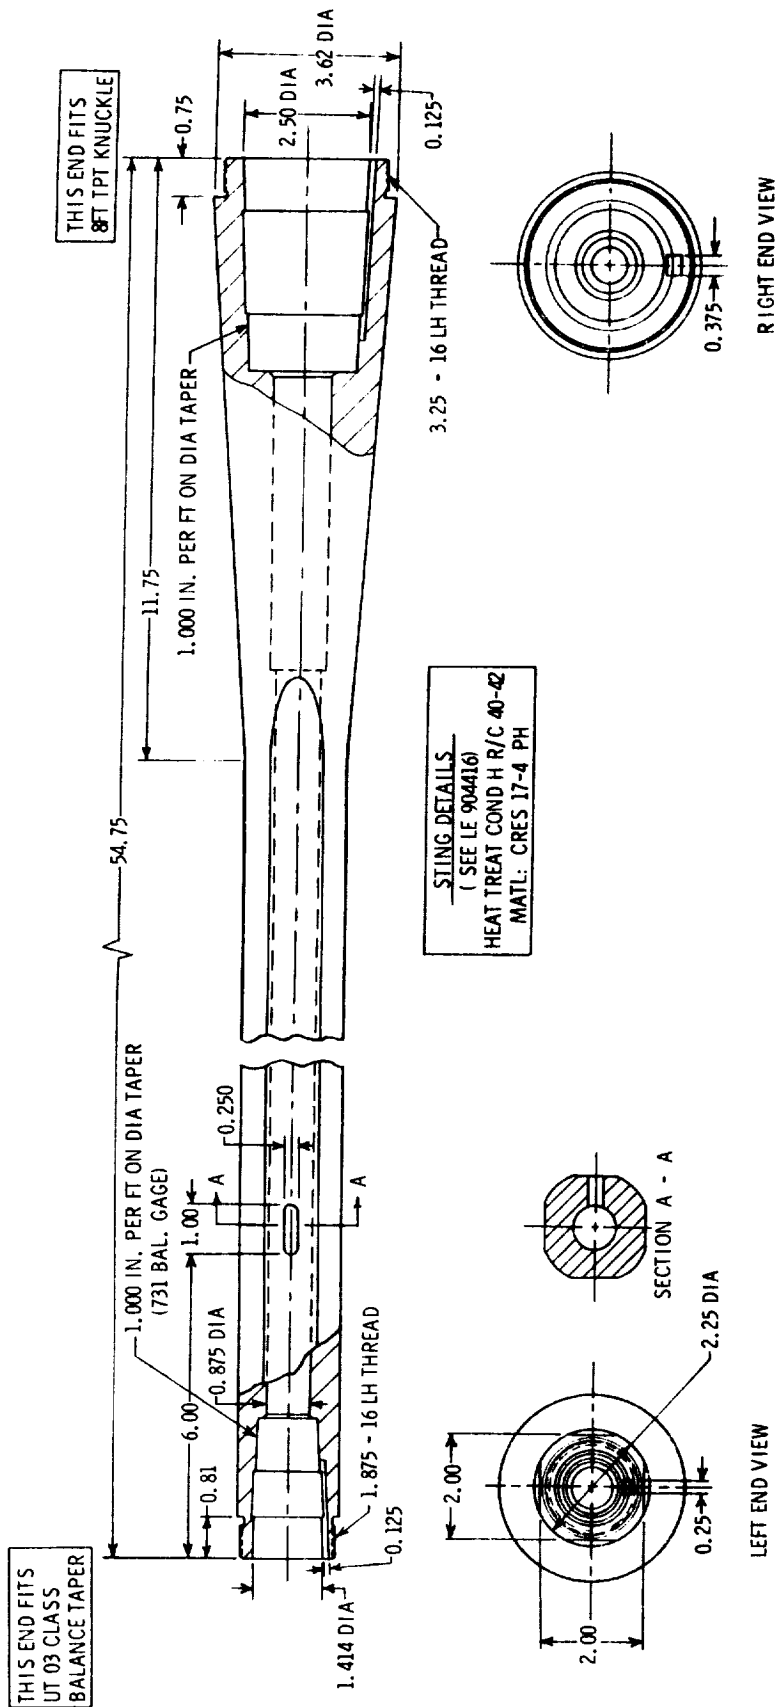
Sketch of sting LE-904416. (All dimensions are in inches unless otherwise indicated.)
